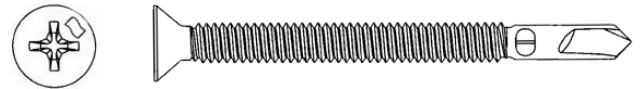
1/4-20 PHILLIPS FLAT HEAD TYPE 13 SCREW
